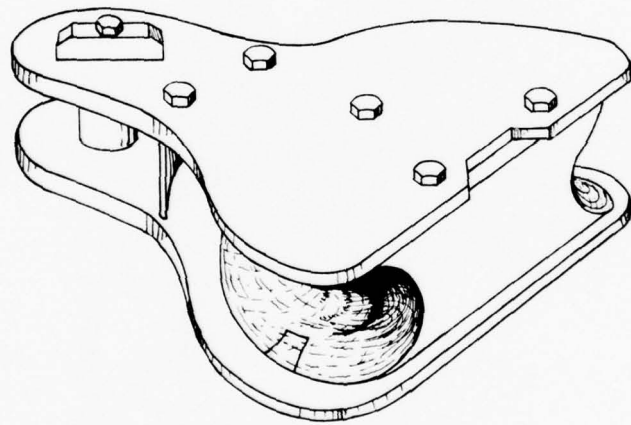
EXAMPLE OF A DETACHABLE HAWSER THIMBLE
